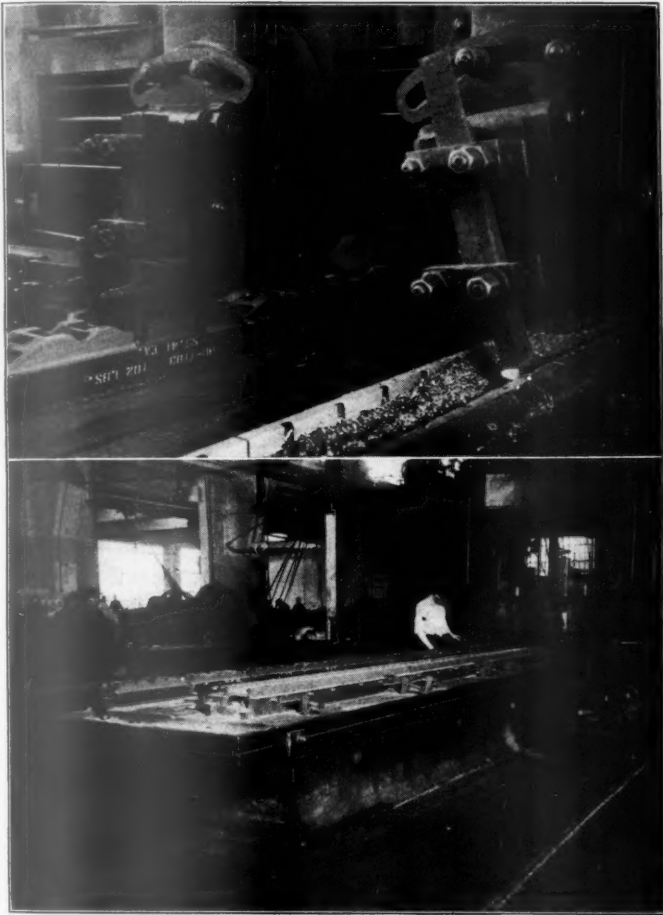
The upper view shows, at the left, the arrangement of four tools for cutting in the return stroke of the planer—
